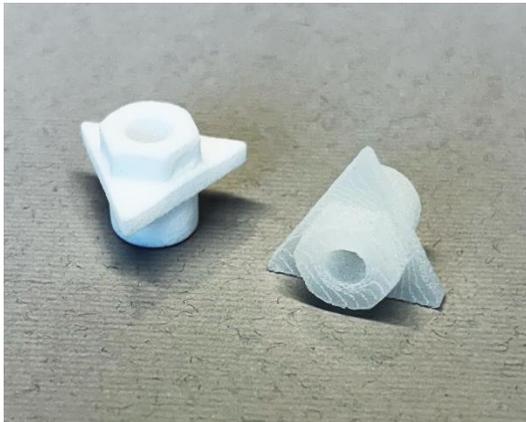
3D-printed parts in PA12 (left) and PP (right), to be screwed onto an existing bracket.
